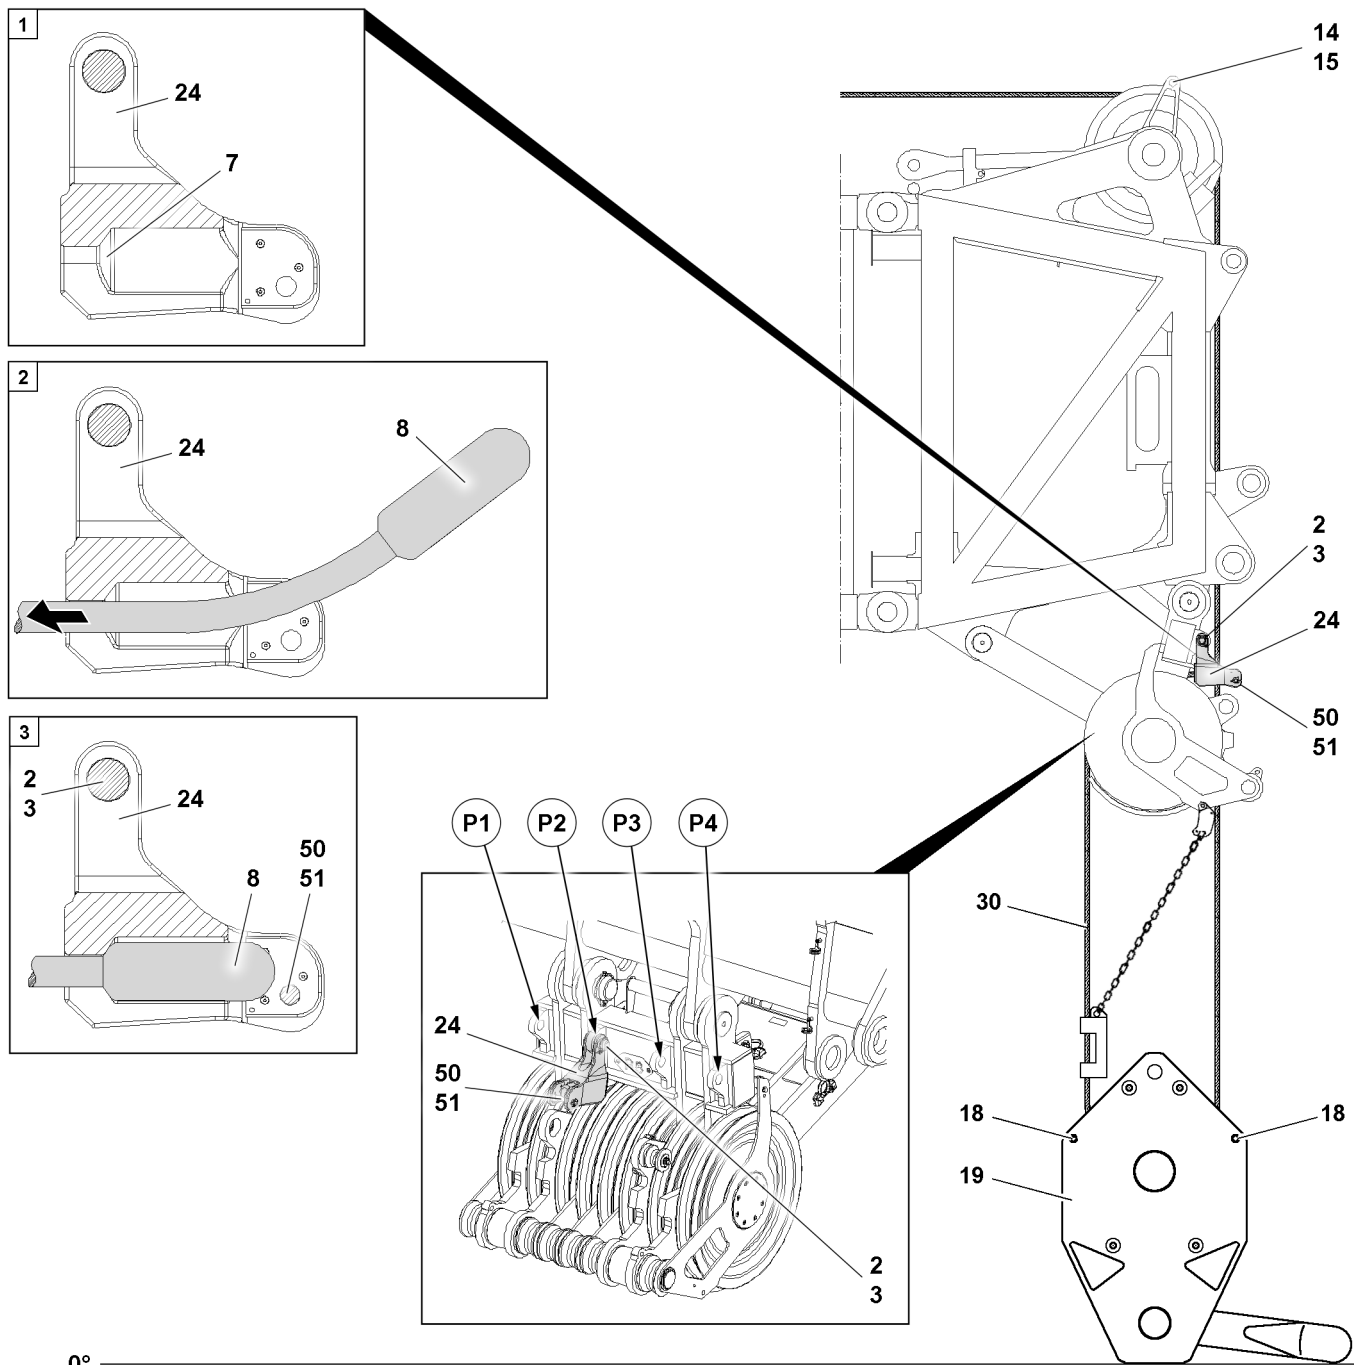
Detailed view of the hook block reeving, rope end connection with L-shaped rope lock
